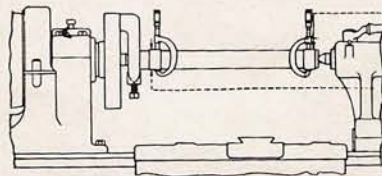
Testing Alignment of Headstock and Tailstock by Machining a Piece Between Centers
